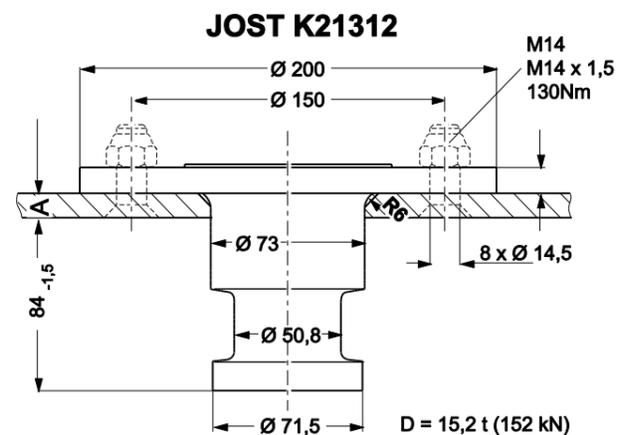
b. – Kingpin on aluminium fifth wheel rubbing plate
